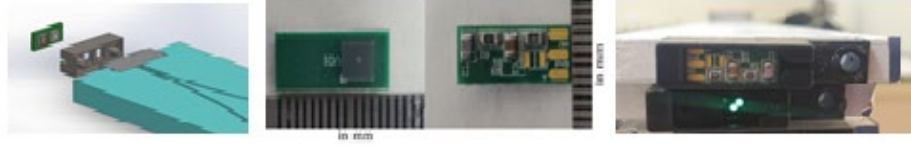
Design drawing of the connection between photodetector and strip; Hamamatsu MPPC/SiPM 14160-3050HS photodetector, soldered to the board and placed by the strip
